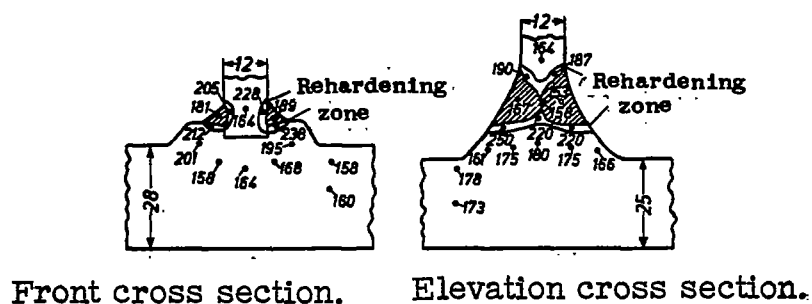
Rehardening in welding of a front cross section and a reinforced elevation cross section of St 52 (according to R. Kühnel).
